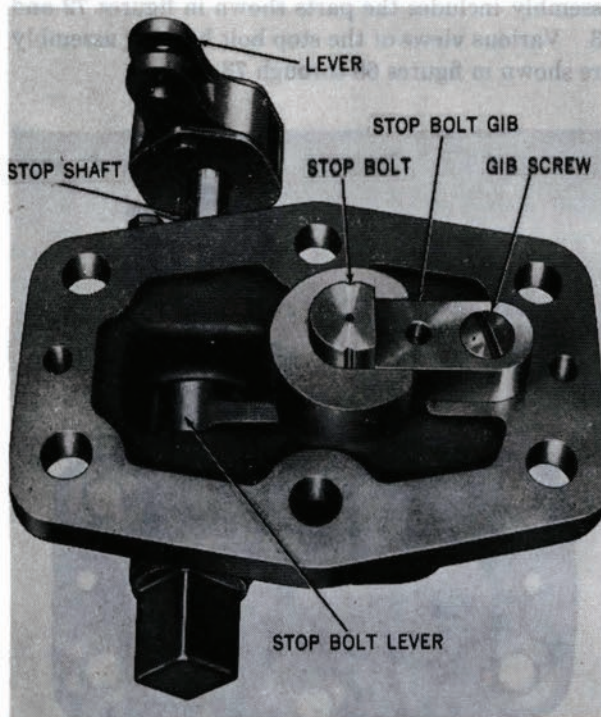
Stop Bolt Housing Assembly—Bottom View—Stop Bolt Down
